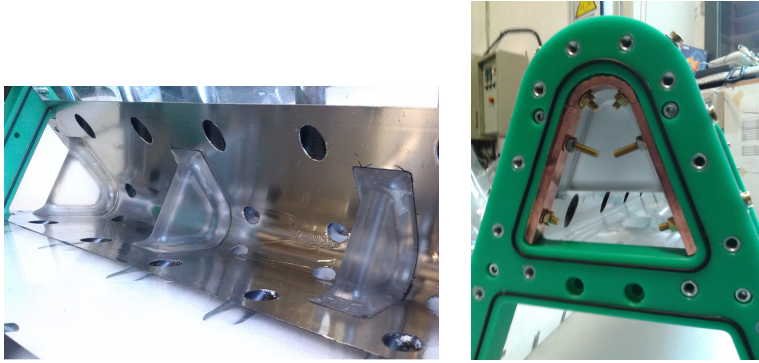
Inconel coated model inner surface (a) and bus bar configuration (b).
